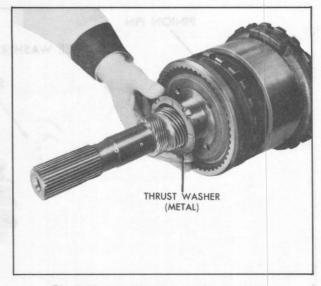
Installing Case-to-Output Shaft Metal Thrust Washer
